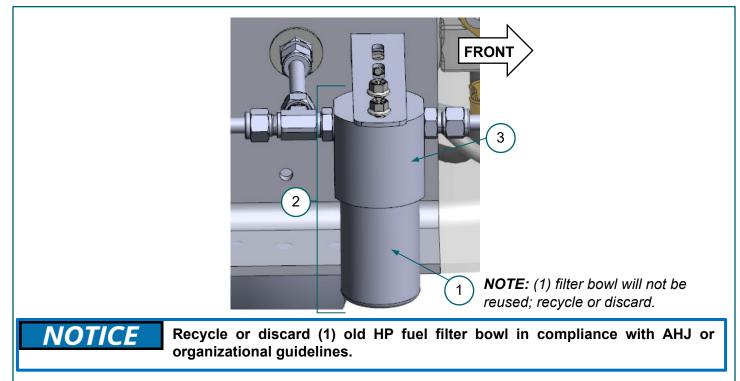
(2) HP fuel filter assembly, (3) HP fuel filter head, (1) filter bowl
